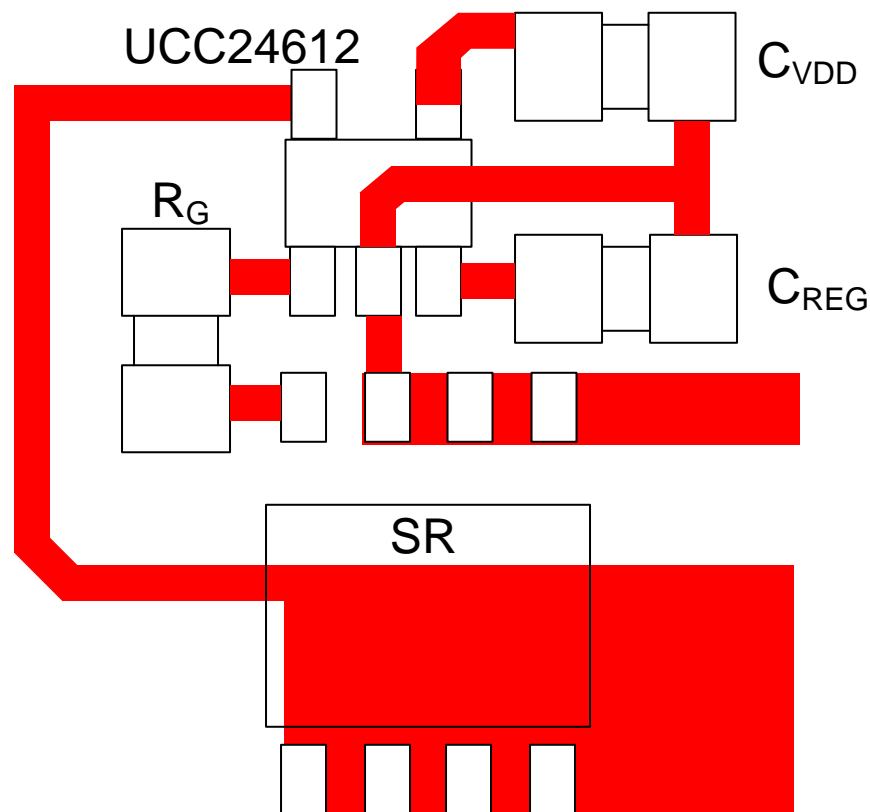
PCB Layout for Driving an SR with SO-8 Package
